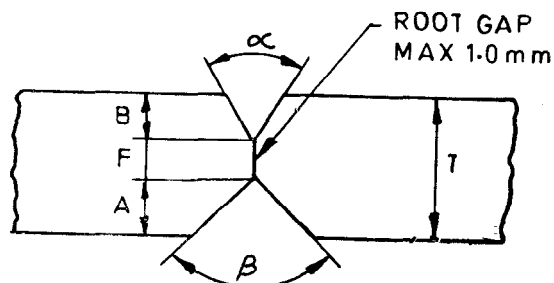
TWO PASS DOUBLE V GROOVE WELDS
